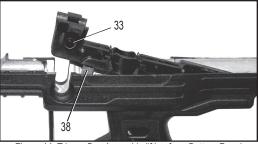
Trigger Box Assembly lifting from Bottom Receiver.
